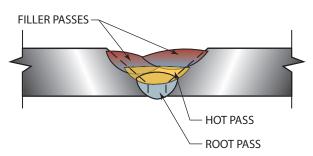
The filler pass(es) should fill the groove as much as possible but not more than to a 1/4 in. (6 mm) thickness at a time.
